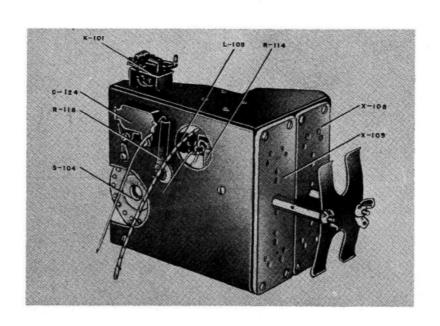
Transmitter Crystal-Bracket Assembly - Top View
